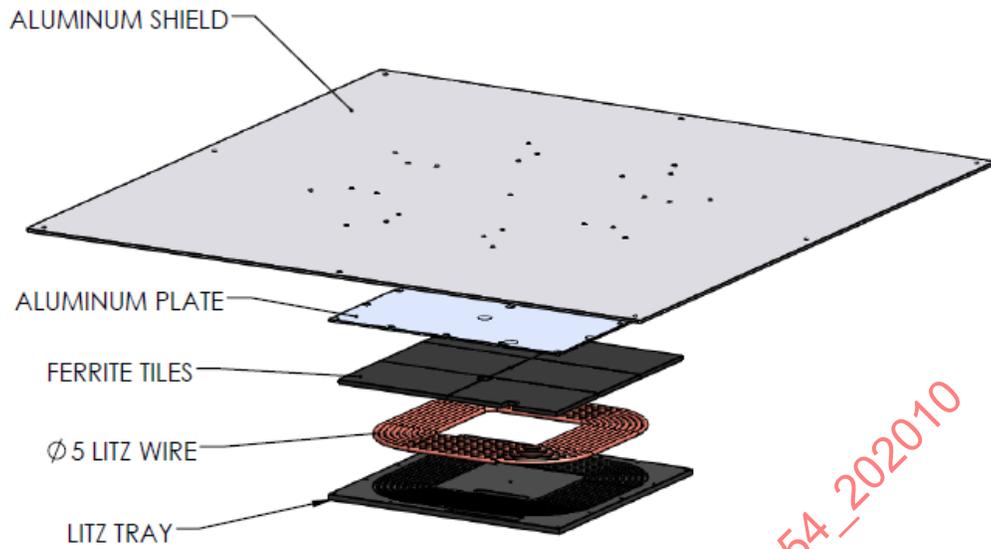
Exploded view of the Test Station VA WPT3/Z1
